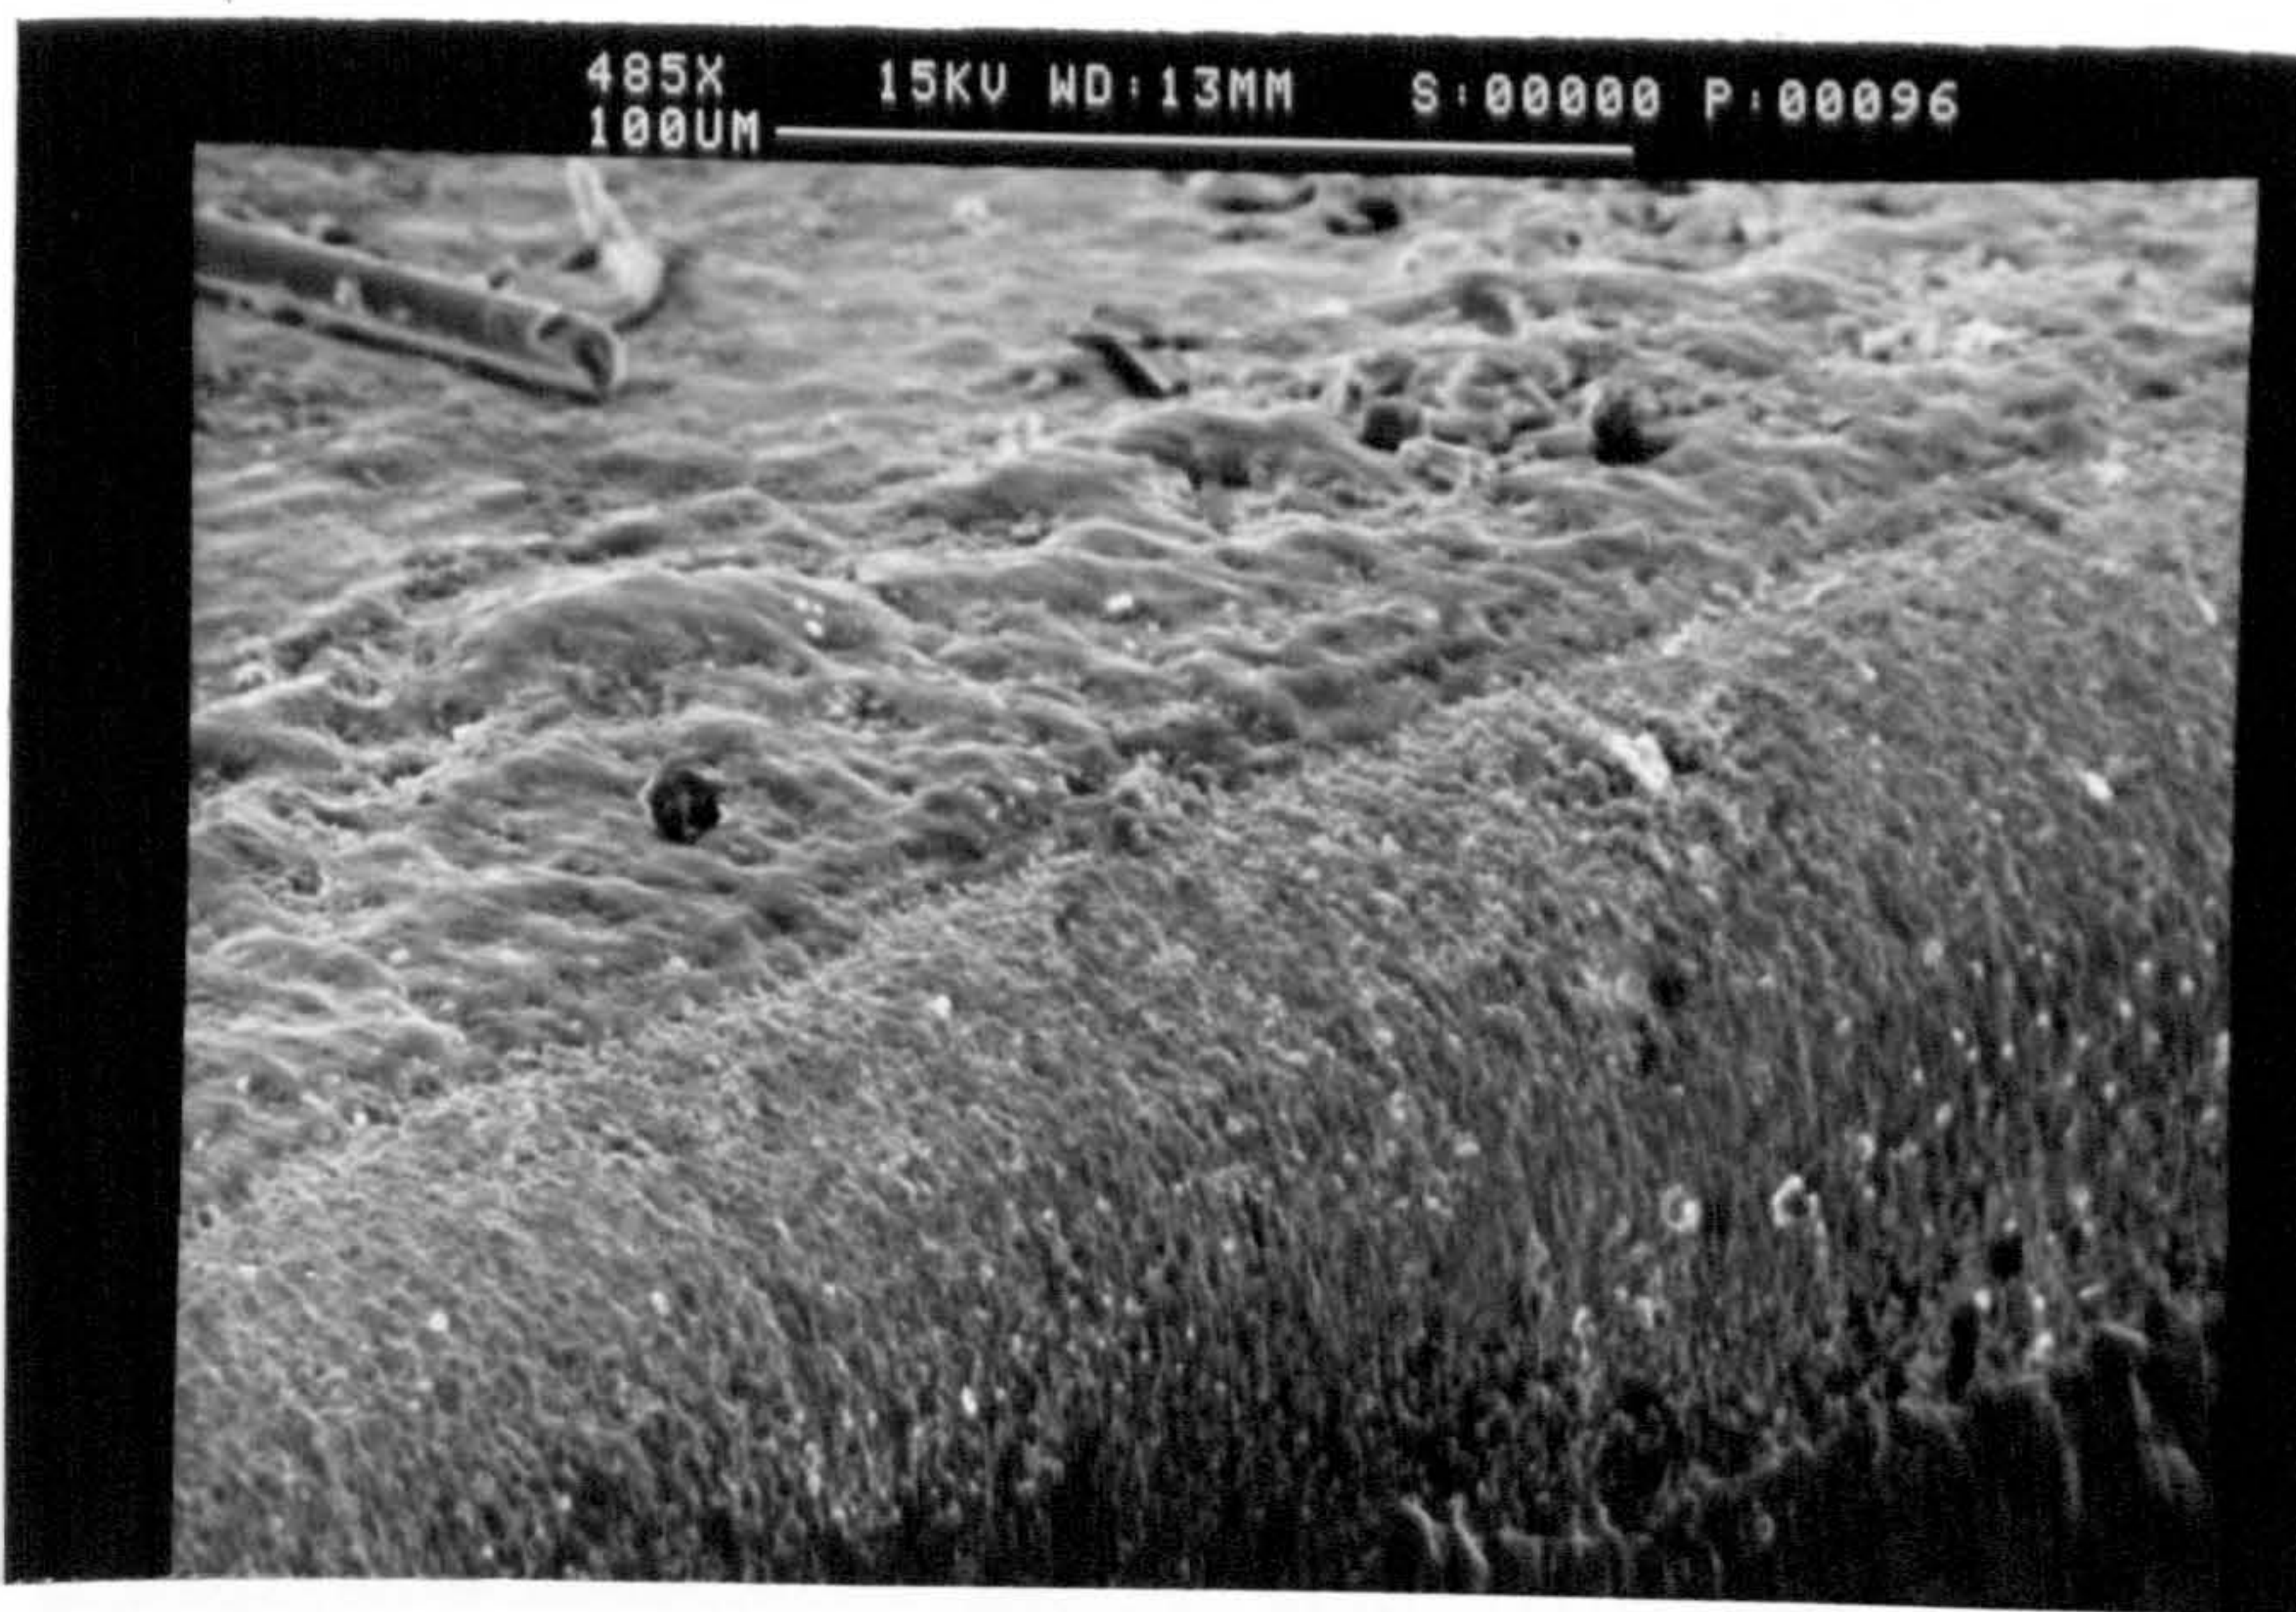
Wear lands on a TiC coated carbide tool after machining at a high speed (250 m/min) (Feed = 0.20 mm/rev, cutting time = 2 min)
